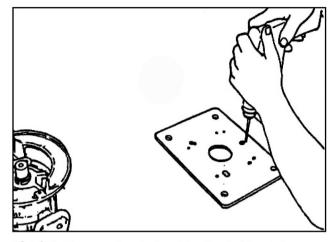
Drill mounting holes into the table plate and countersink or counter bore the top side of table plate so the head mounting screws are slightly below its surface.
